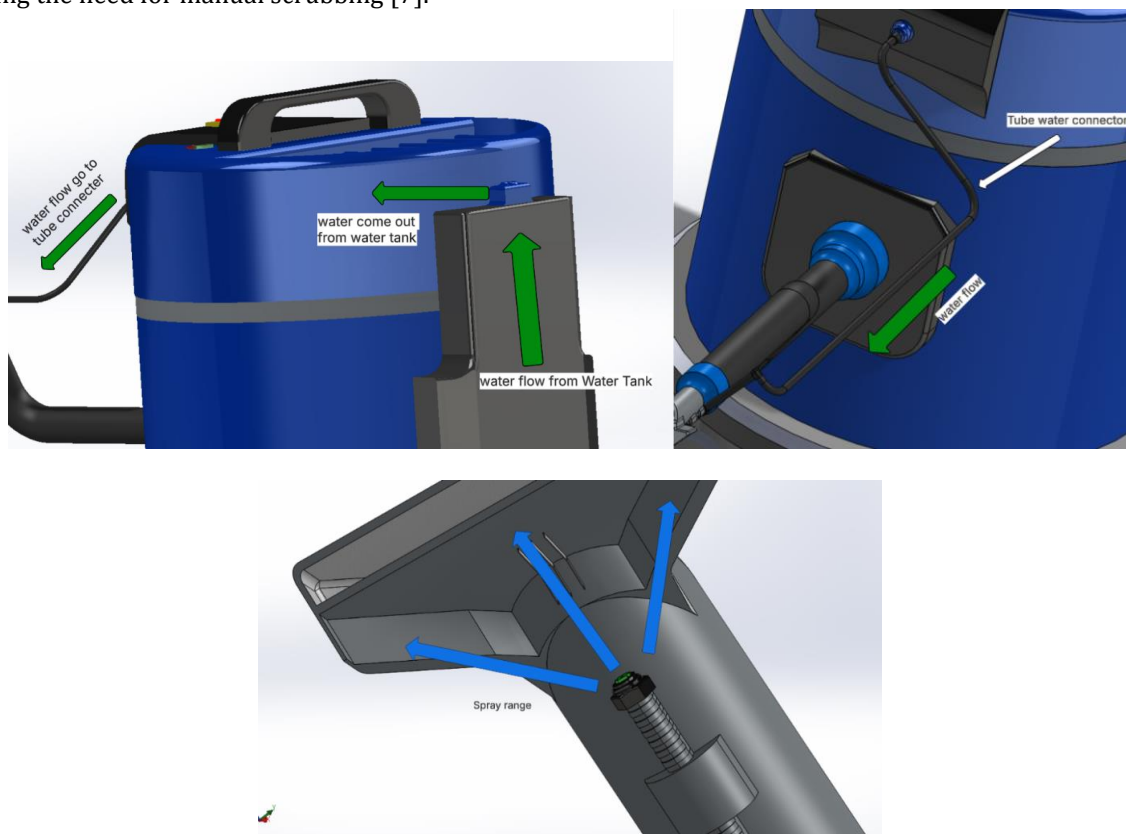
Nozzle Sprayer Mechanism Multi-Sprayer Ash Vacuum
